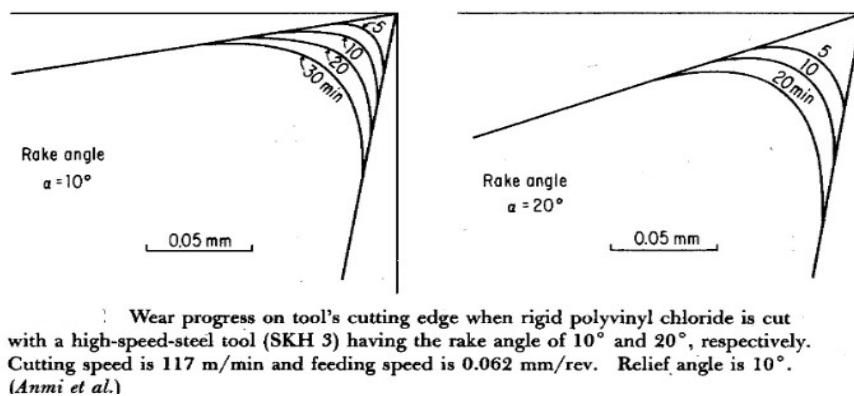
Tool edge wear on tool steel cutting edges⁷⁵
